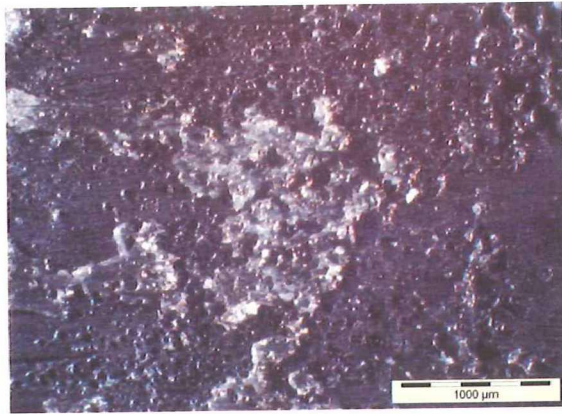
The presence of numerous voids at the welding interface indicates that PEKK started to degrade in a sample clip welded at 800 [J].
